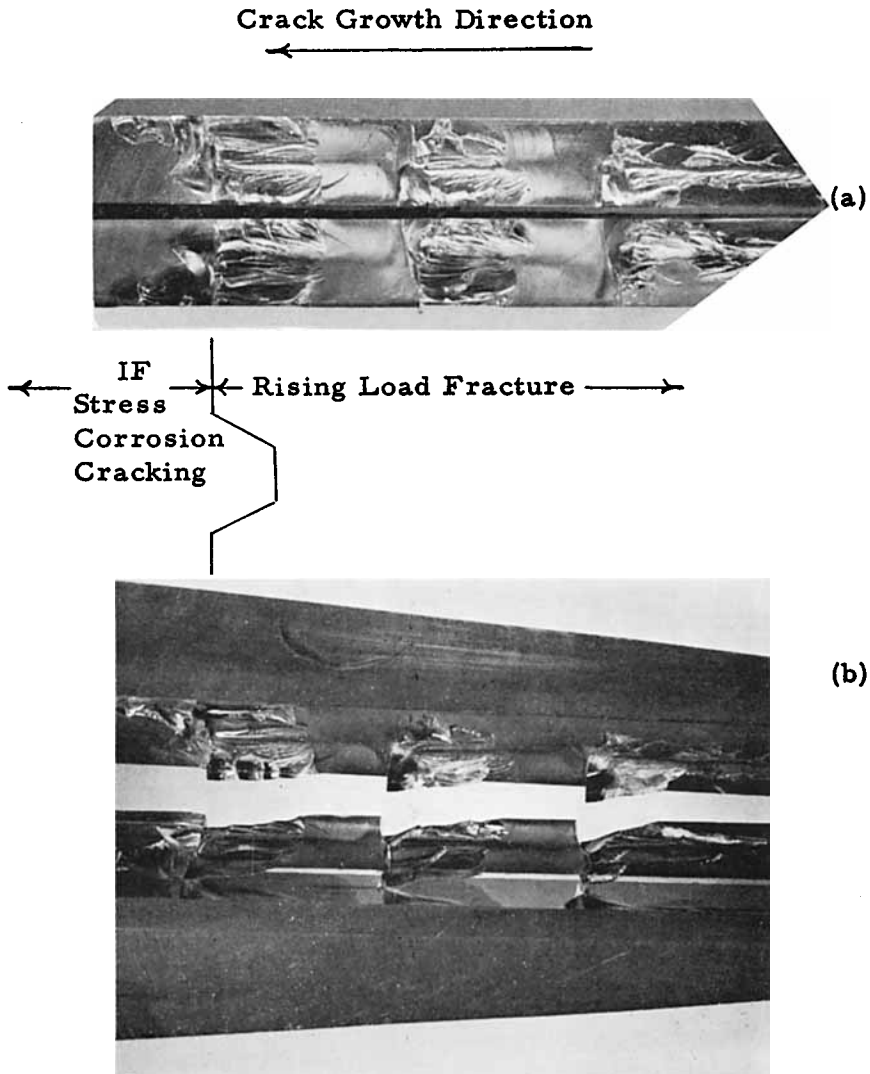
Fracture surface photographs of 250 mil 70H/311 adhesive bond: (a) top view; (b) oblique view.
